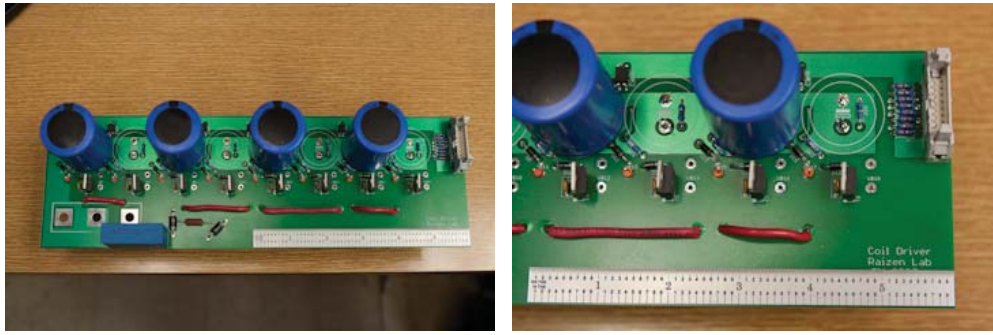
Photographs of the 64 stage coilgun coil driver board. At left, the entire board is shown (except for the IGBT which mounts to the three square pads). At right, a zoom-in view provides more detail.
